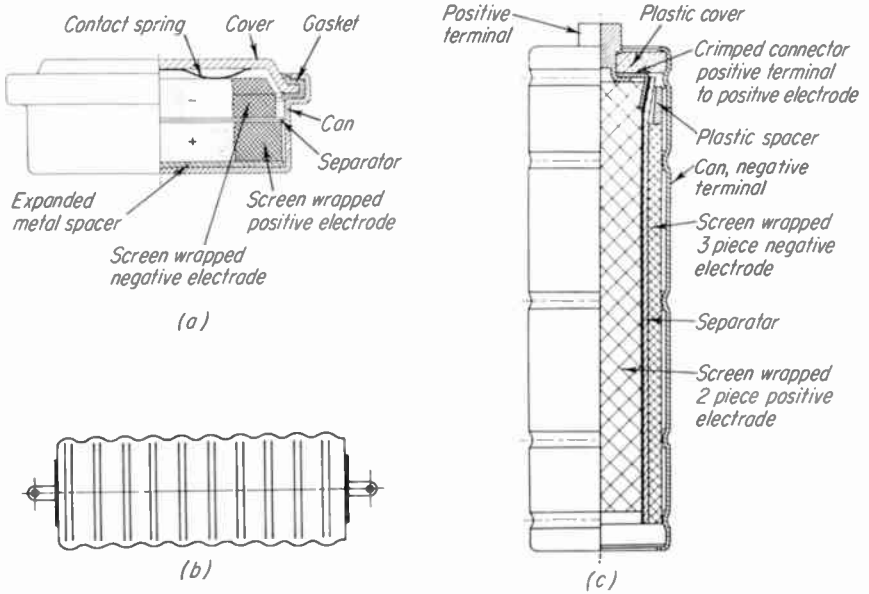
Nickel-cadmium cells. (a) Cutaway view of a button cell. (b) Button stack assembly. (c) Cutaway view of a cylindrical cell. (Union Carbide Corporation, Consumer Products Division)
